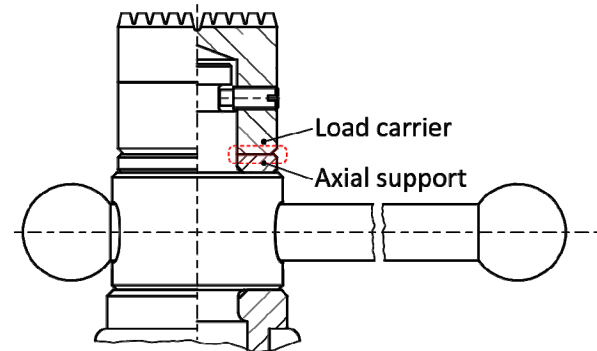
Friction of movable threaded joint (power screws); sliding surface is denoted with red rectangle
